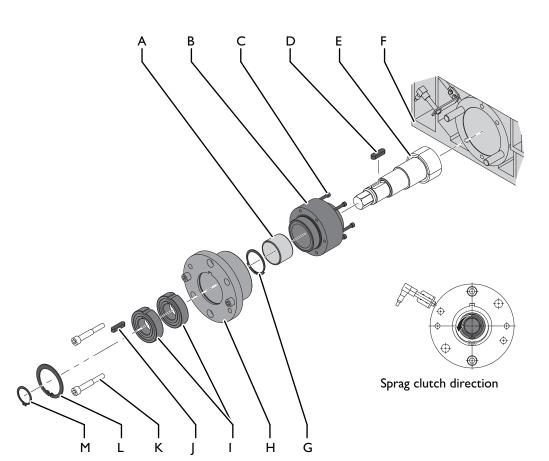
Replacing pinion, sprag clutches and plain bearings
